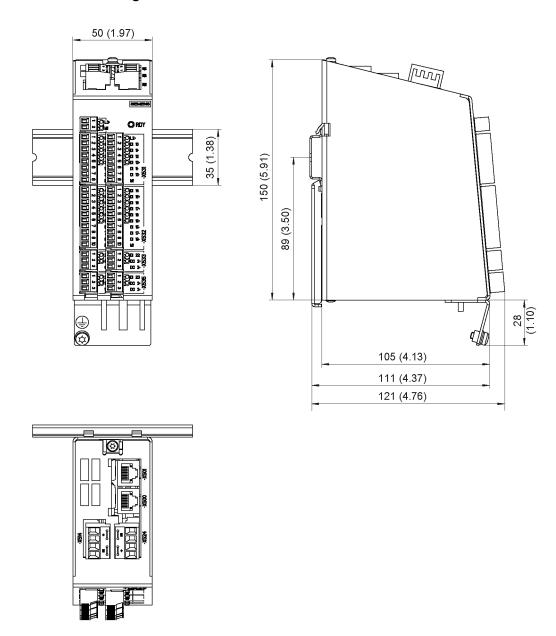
Dimension drawing of Terminal Module TM54F, all data in mm and (inches)
